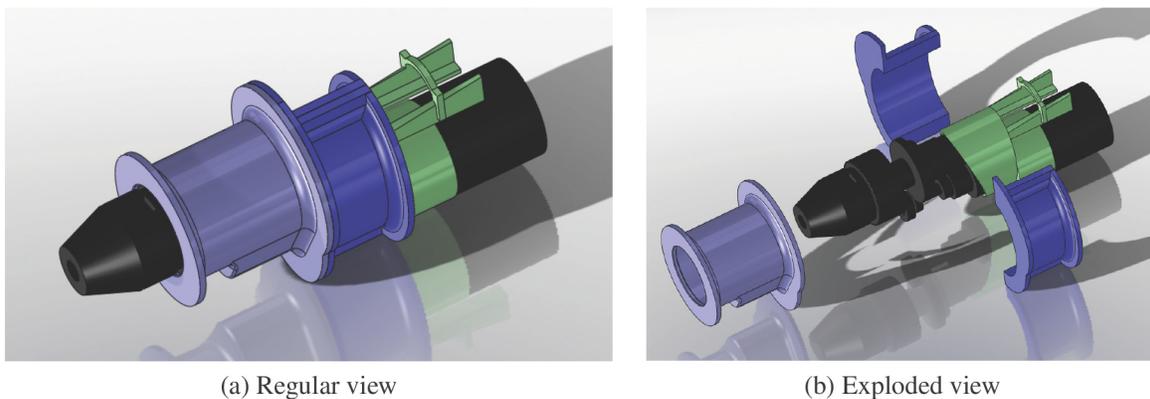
SolidWorks rendering of the drill housing design together with the Bosch drill mechanism.
